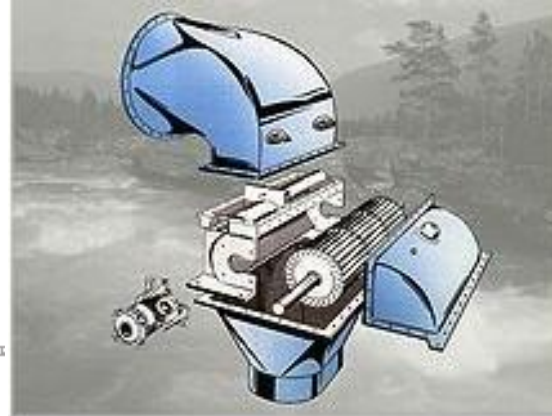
Exploded view of a Ossberger crossflow turbine illustrating the main components
